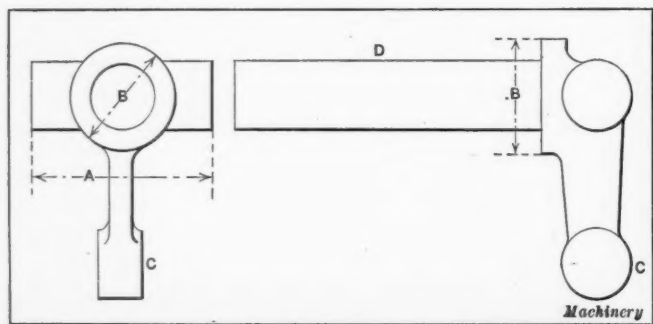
Rectangular Bar that is rough-forged with Steam Hammer
